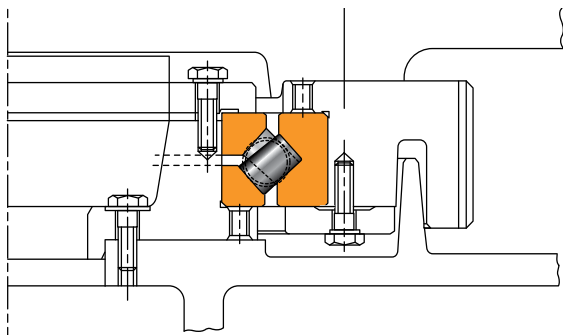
Typical mounting arrangement of a TXRDO bearing.
